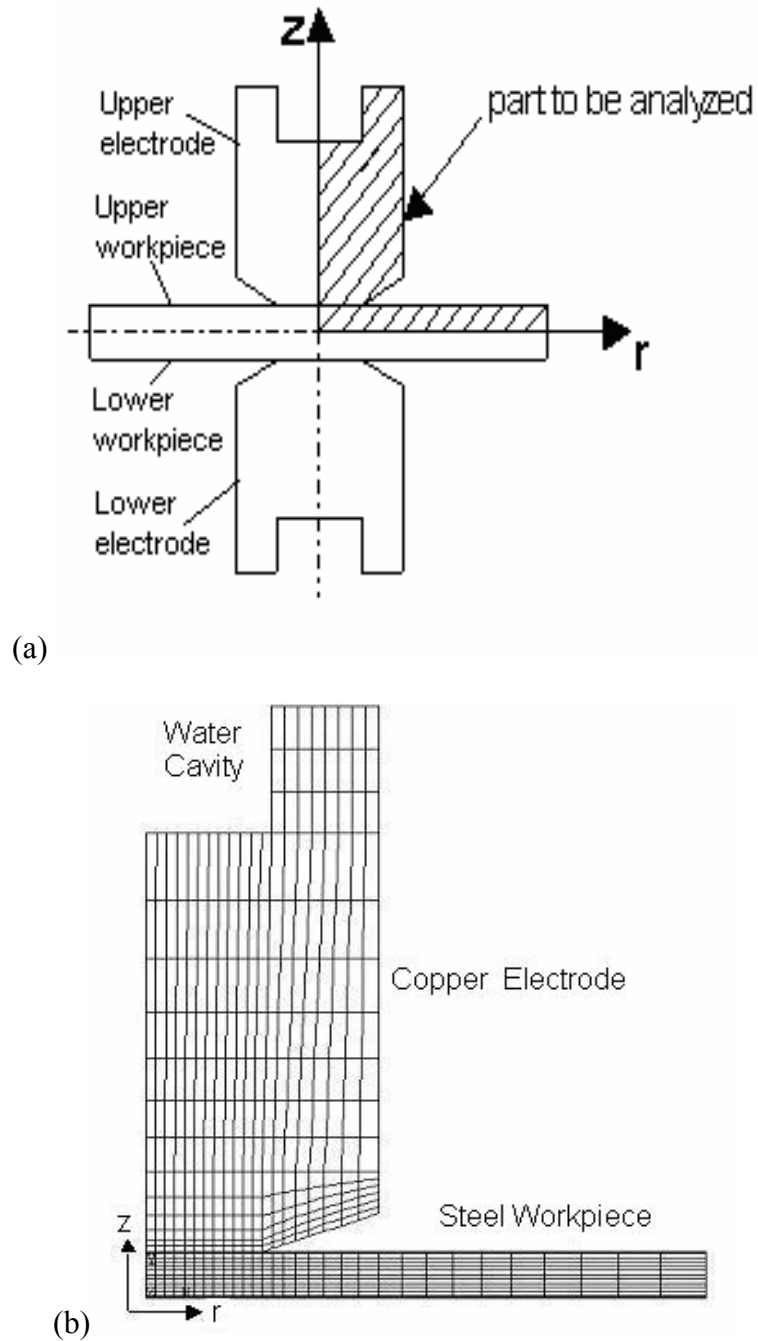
(a) Axisymmetric model of spot welding setup (b) Finite element model for spot welding
